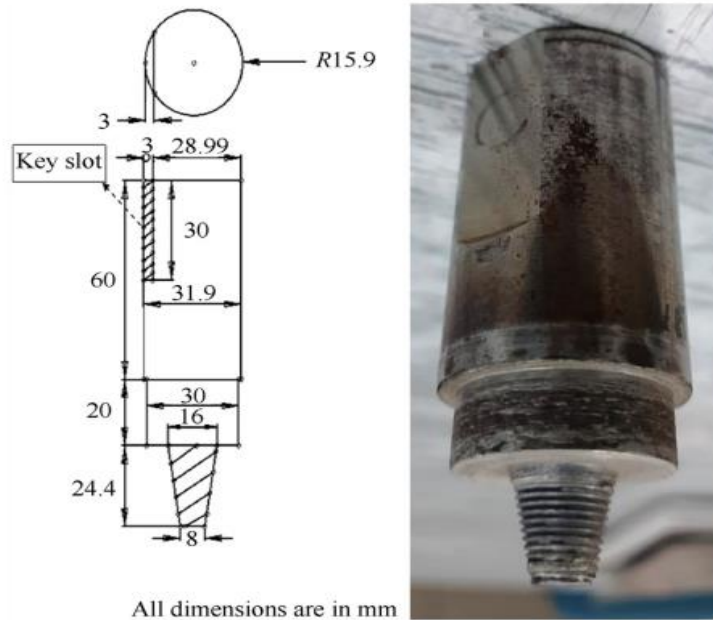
Showcases the FSW tool used to create 25-millimetre-thick welds
